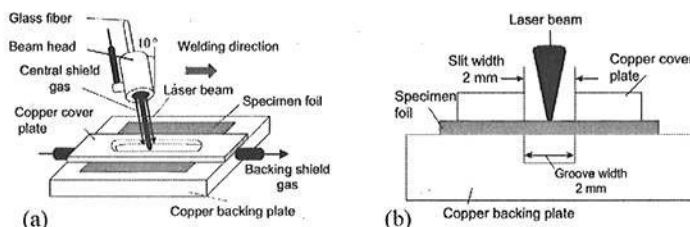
Schematic view of specimens during laser welding in the Ni-based metallic glass (a) setup of laser head and specimen holder and (b) cross-sectional view of specimen holder.
